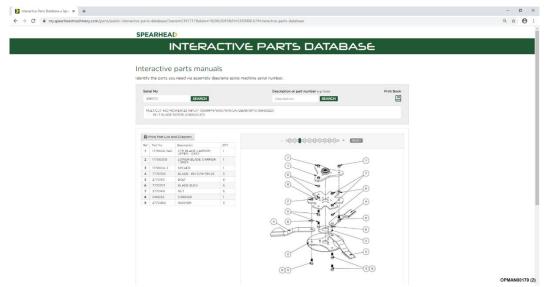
Exploded Parts Breakdown With Bill Of Materials
